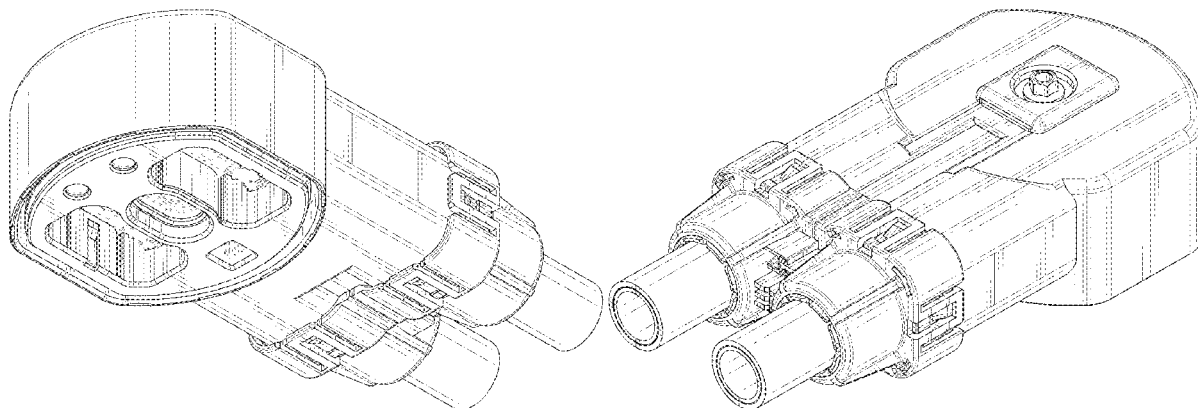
is a perspective view showing a rear, bottom and left side thereof;
